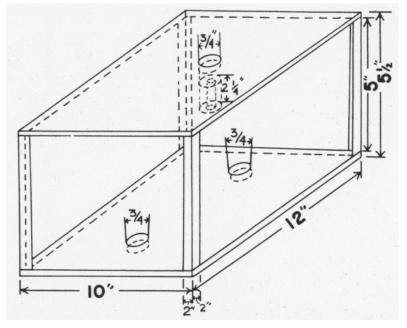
Diagram of dimensions for 14.5-mm artillery trainer mount. The bottom holes are 8 inches apart, center to center. The top of the mount should be covered with a thin sheet of brass, copper or aluminum to protect the brass base of the trainer.
